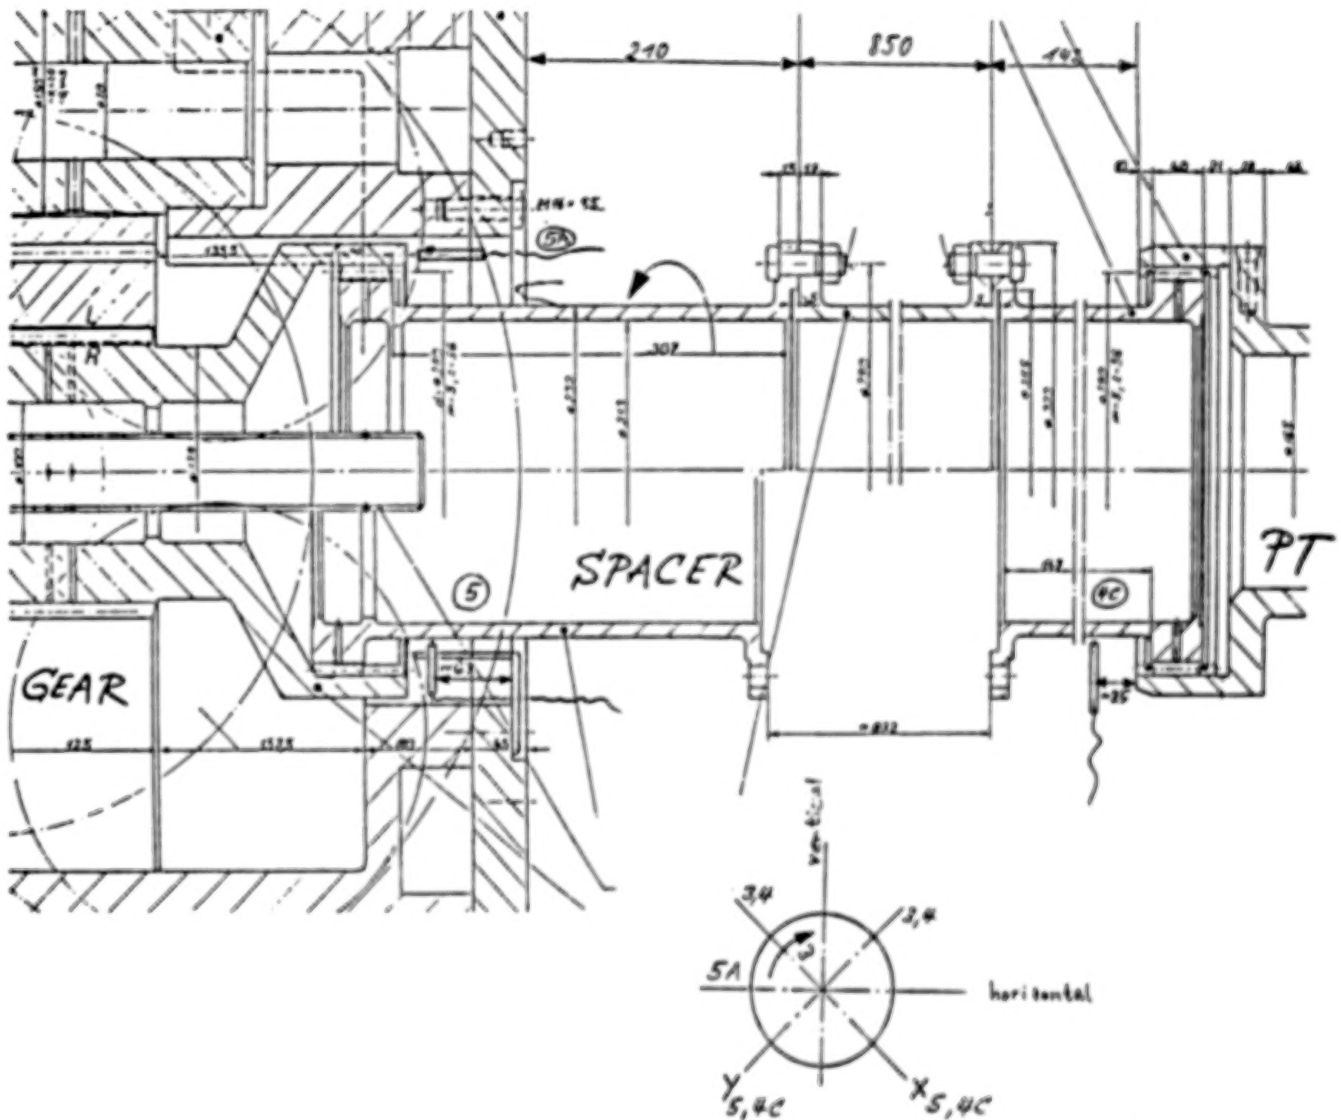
Drawing of the Pinion and Gear Coupling and the Locations of the Additional Probes.
